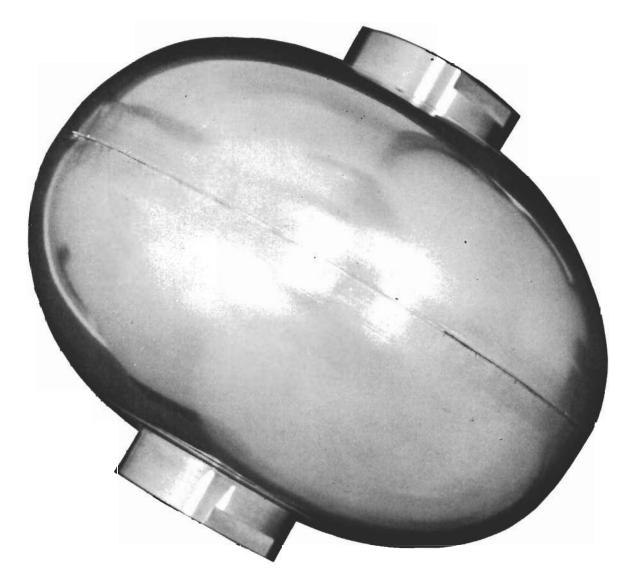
View of Welded Liner for Subscale Oblate-Spheroid Tank
